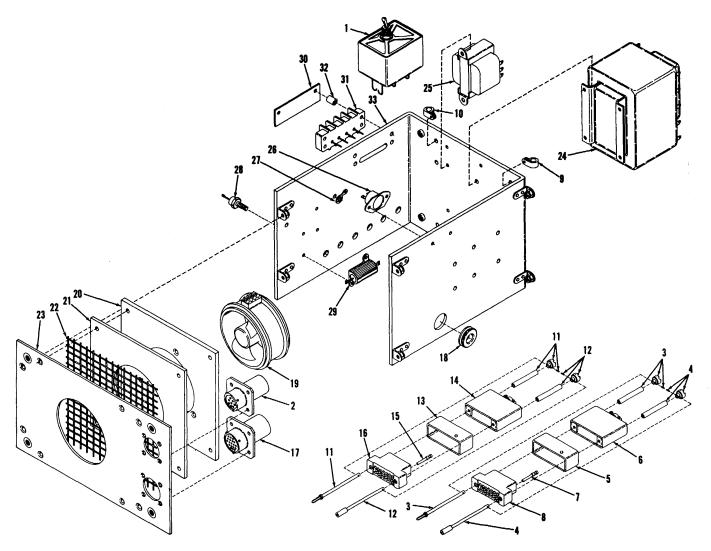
400 Hz Three Phase Power Supply Assembly
